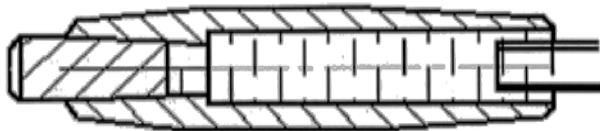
Sectional view of an resistance welding composite electrode with an insert tip.
